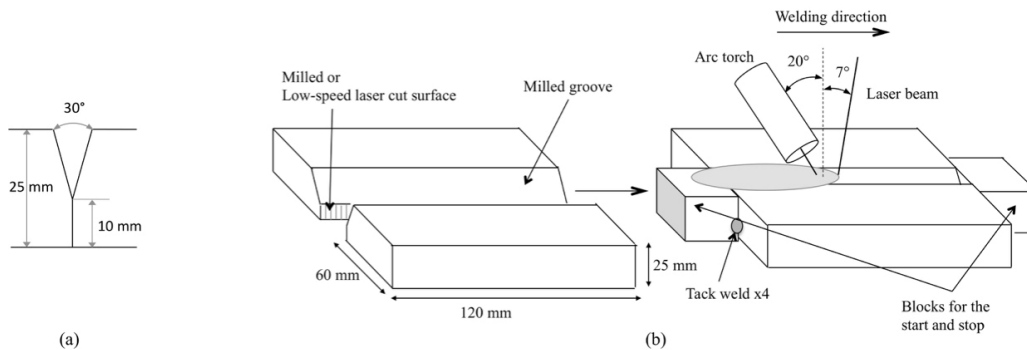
Preparation and setup for Two-pass welding: (a) groove geometry, (b) overall procedure.
